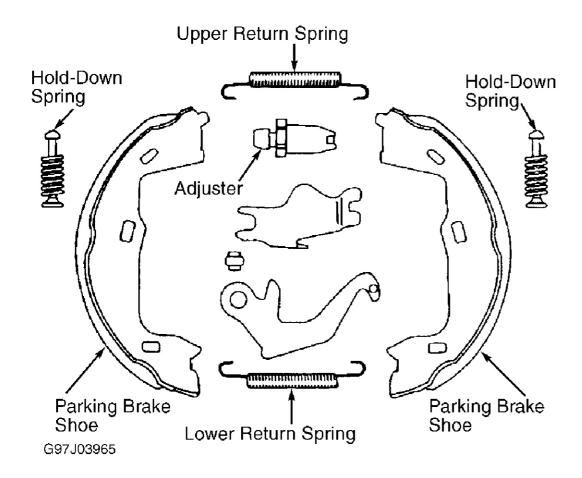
Identifying Parking Brake Components Courtesy of GENERAL MOTORS CORP.
